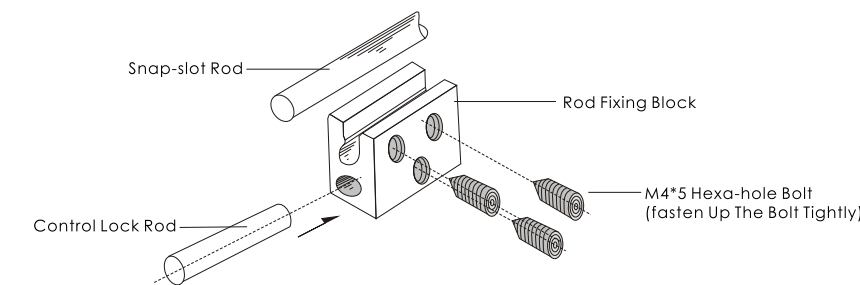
ASSEMBLING OF DOOR-LOCK CONTROL ROD
